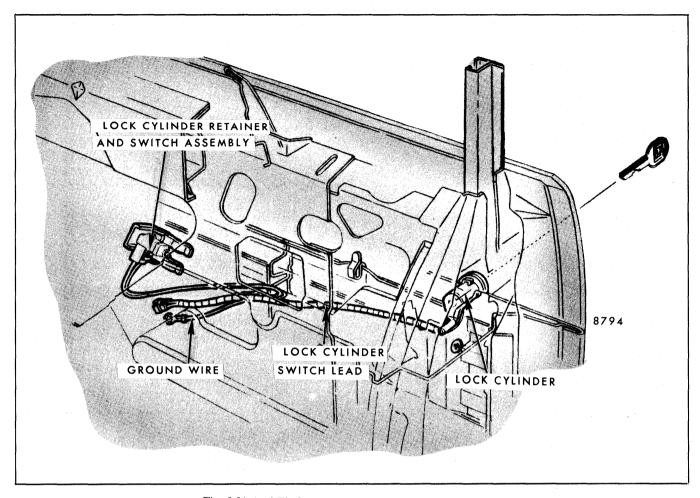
Anti-Theft Door Lock Cylinder Assembly
